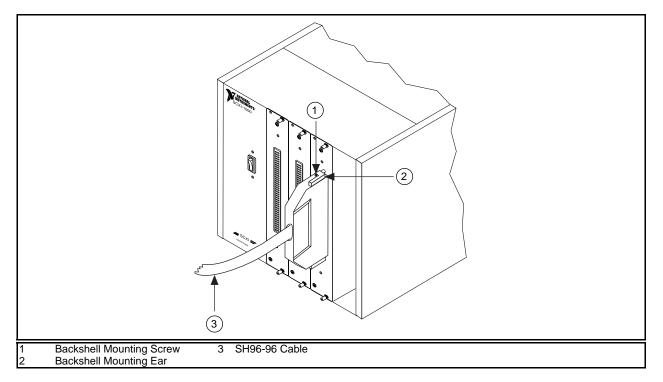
Connecting the SH96-96 Cable to the SCXI Module
